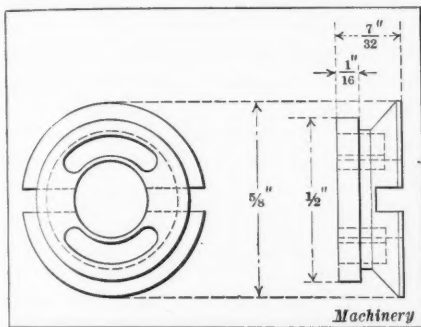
Firing Pin Plug upon which Routing Operation is performed
